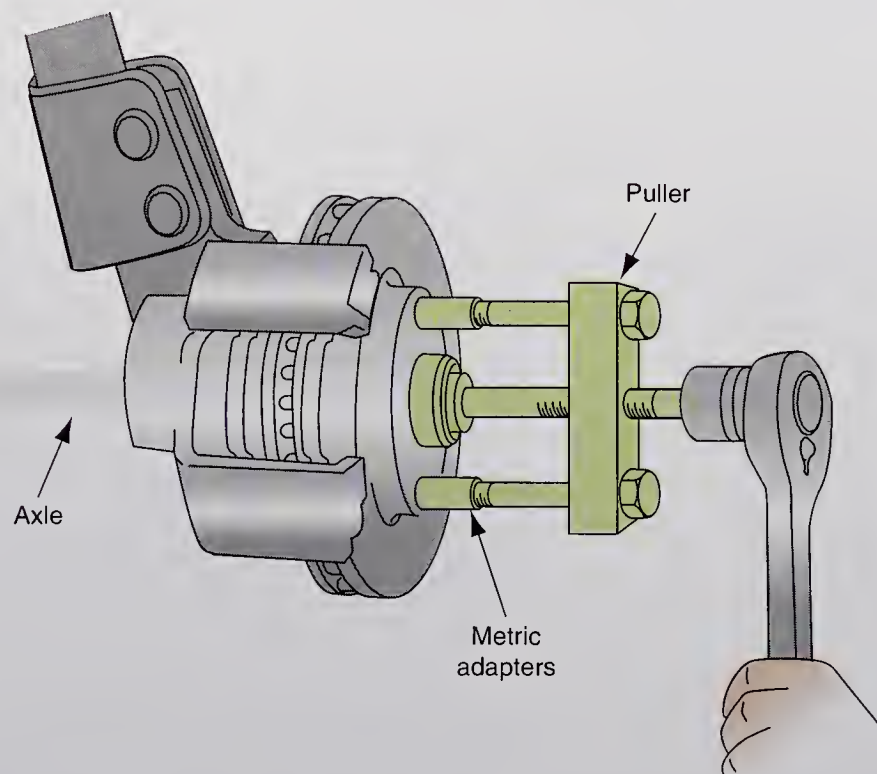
Removal of outer axle joint from front wheel hub.
